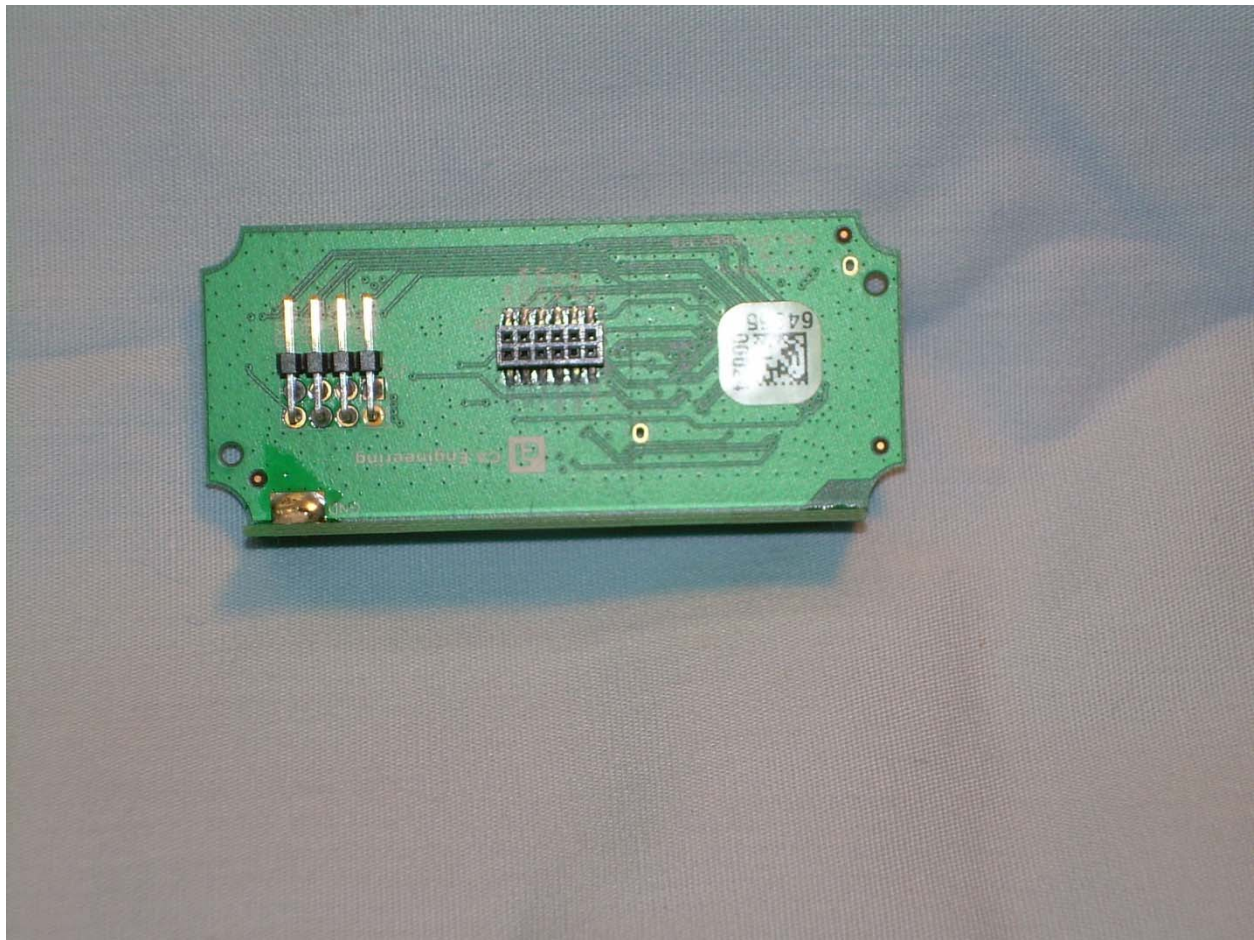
View of the Top Side of the PCB with RF Shielding Removed
